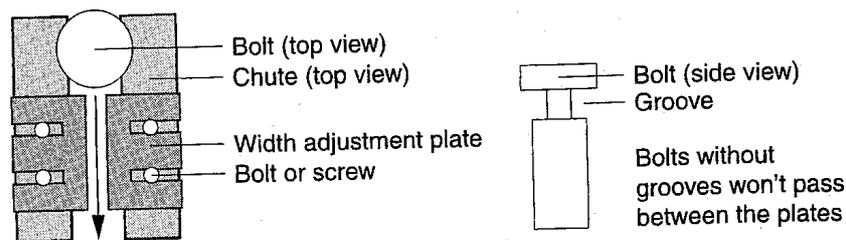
An example of an error-proofing chute to catch any defective bolts before they went further in the production process (Levinson & Rerick, 2003, p. 78)
